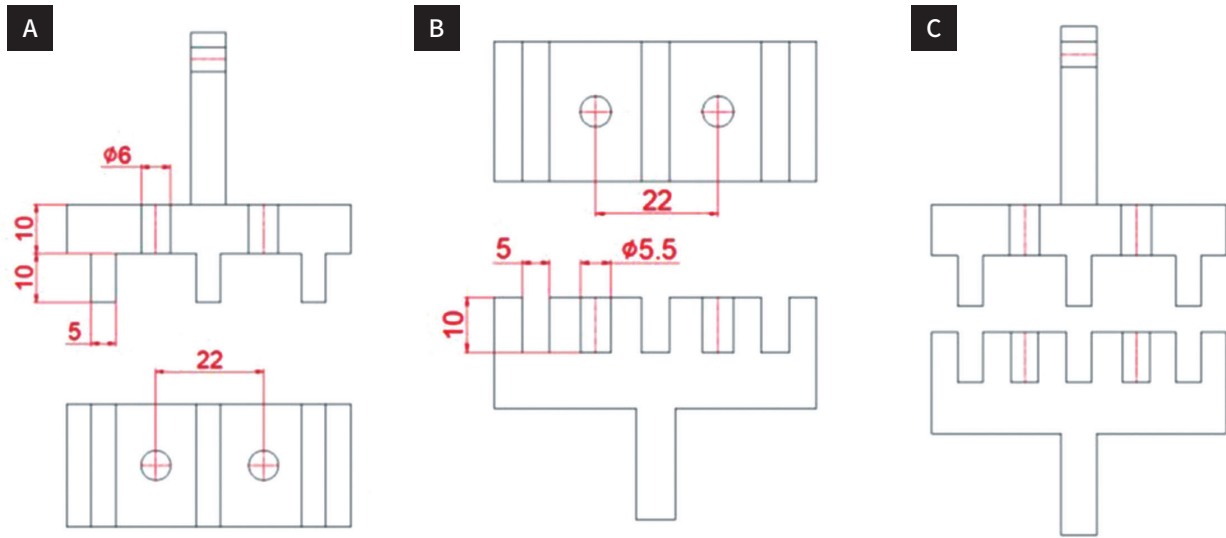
Custom base mountings. (A) Frontal and top view of the upper mounting. (B) Top and frontal view of the lower mounting. (C) Frontal view of the upper and lower mountings.
